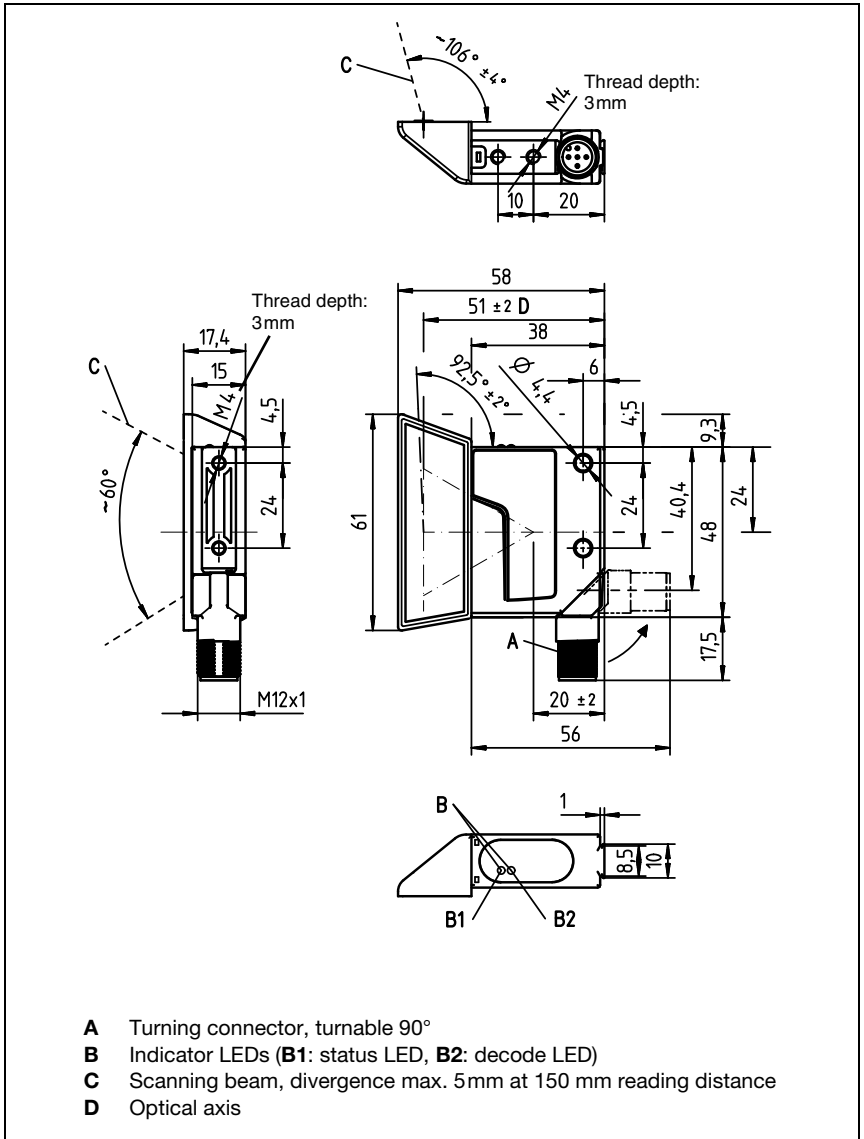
BPS 8 SM 100-01 dimensioned drawing
